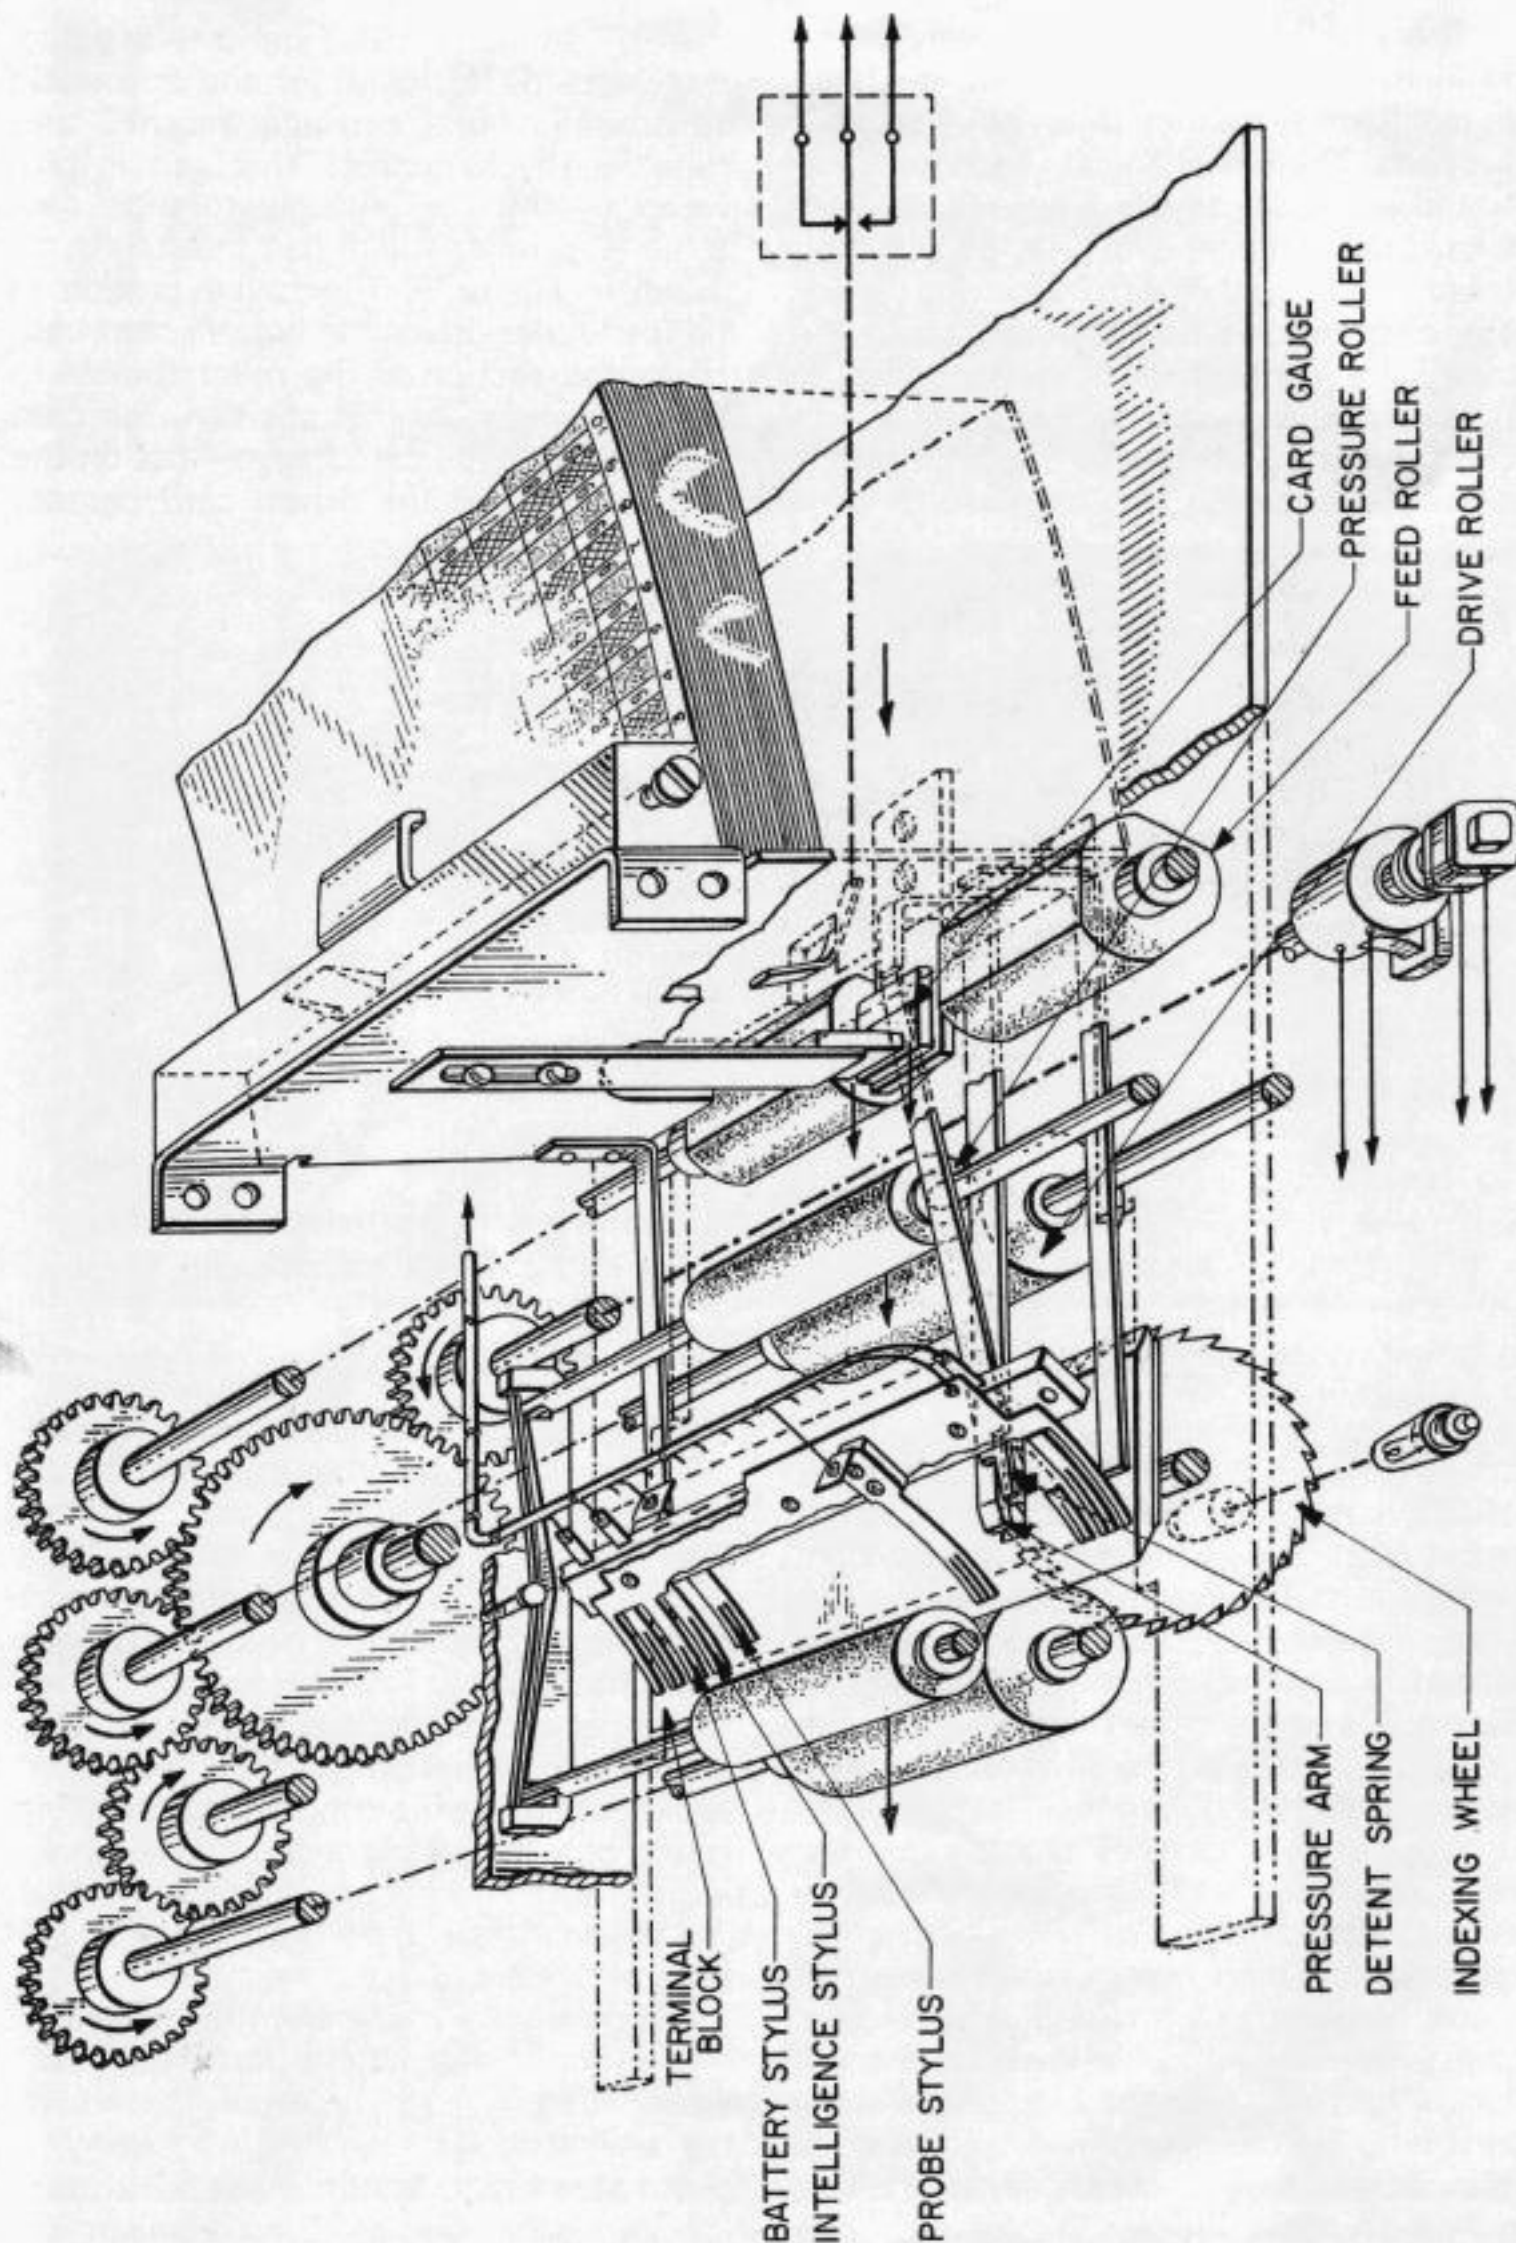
Schematic Drawing of the Mechanical Section of the Punched Card Transmitter
